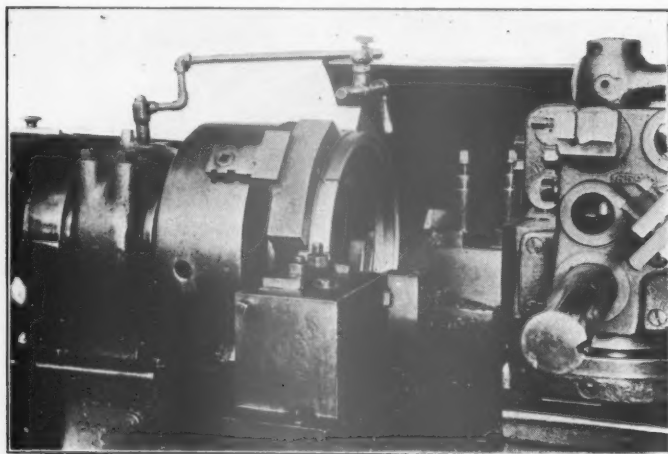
Cutting First Ring from Tub and Facing Second Ring
